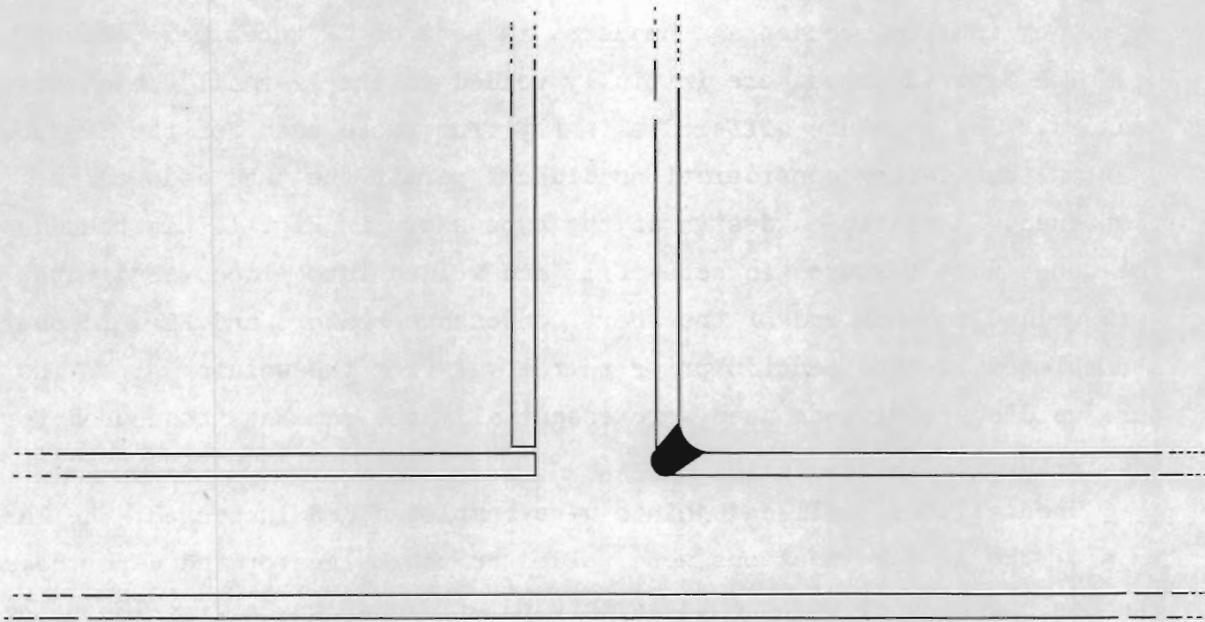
Joint Design Used for Welding Small Ends of Tubes to
